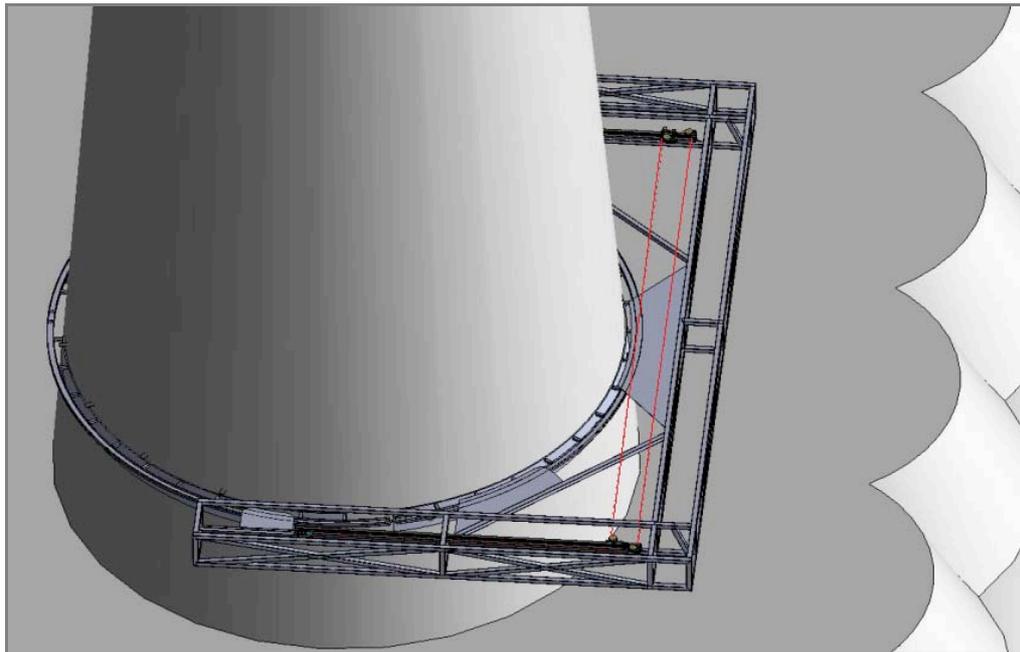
CUT concept for an orbital diamond wire cutting machine, prior to cutting
